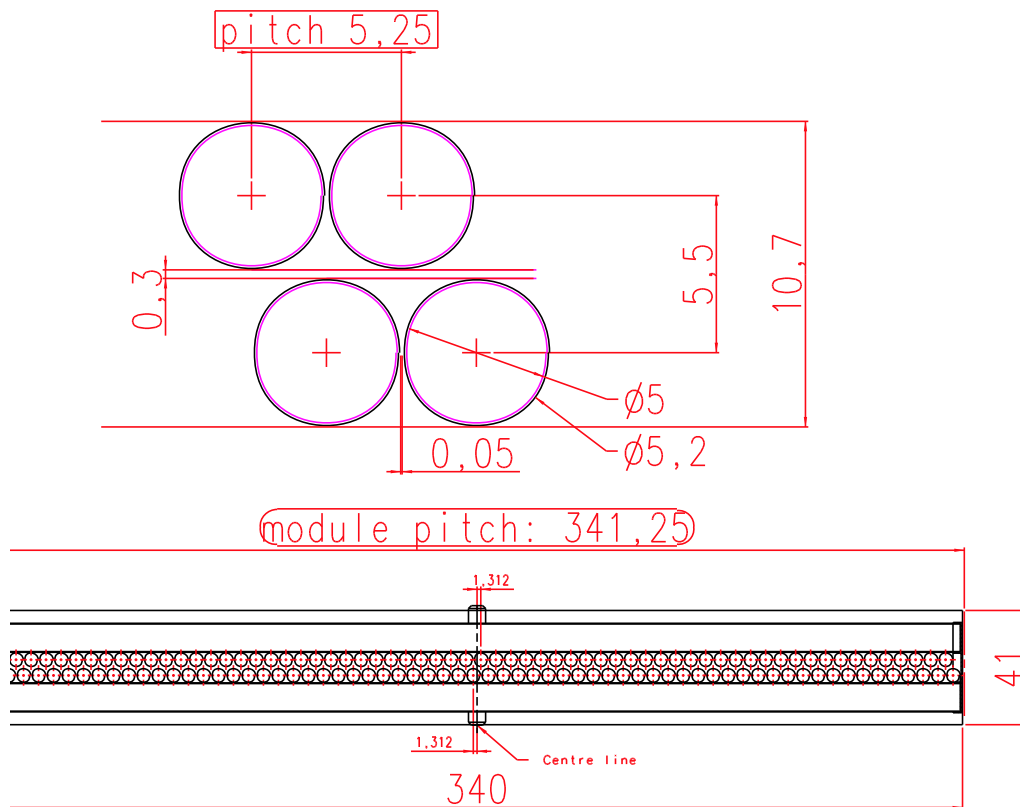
Top view of a module layer including the straw tube cross section. All dimensions are in mm.
